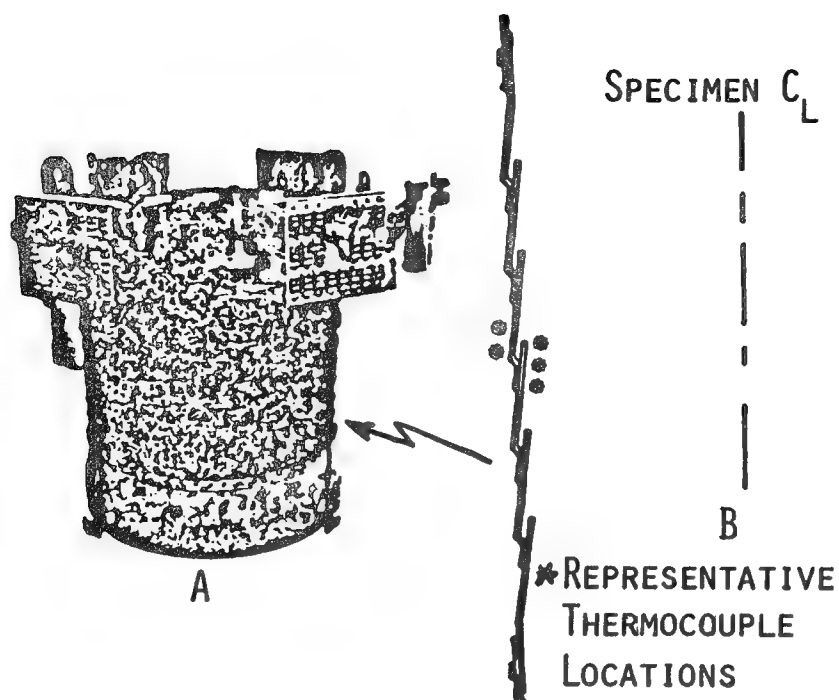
Assembled Liner Test Specimen (A) and 5-Louver Test Section (B)
